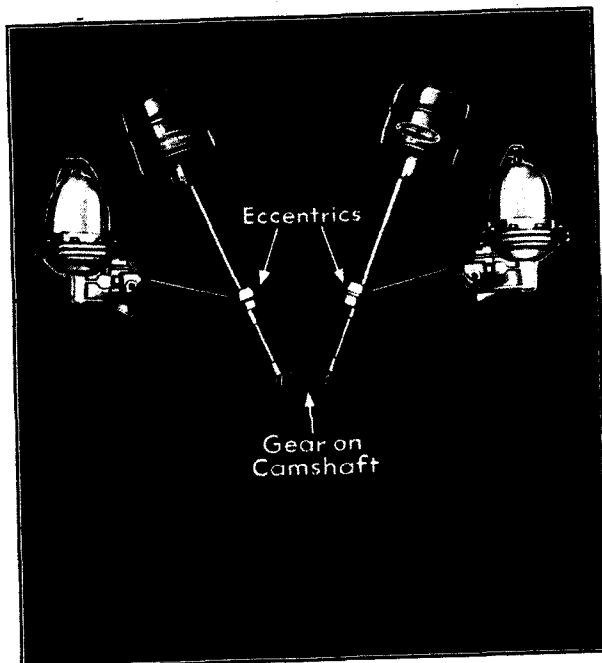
Phantom view of distributor and fuel pump drive mechanism on 38-90 engine
